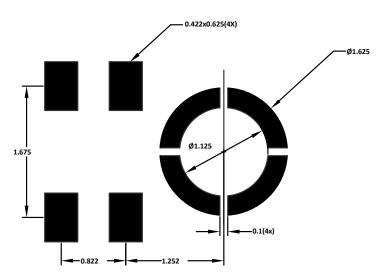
Suggested Solder Paste Stencil Pattern Layout
